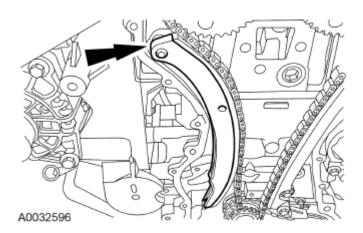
Locating Timing Chain Guide Courtesy of FORD MOTOR CO.
